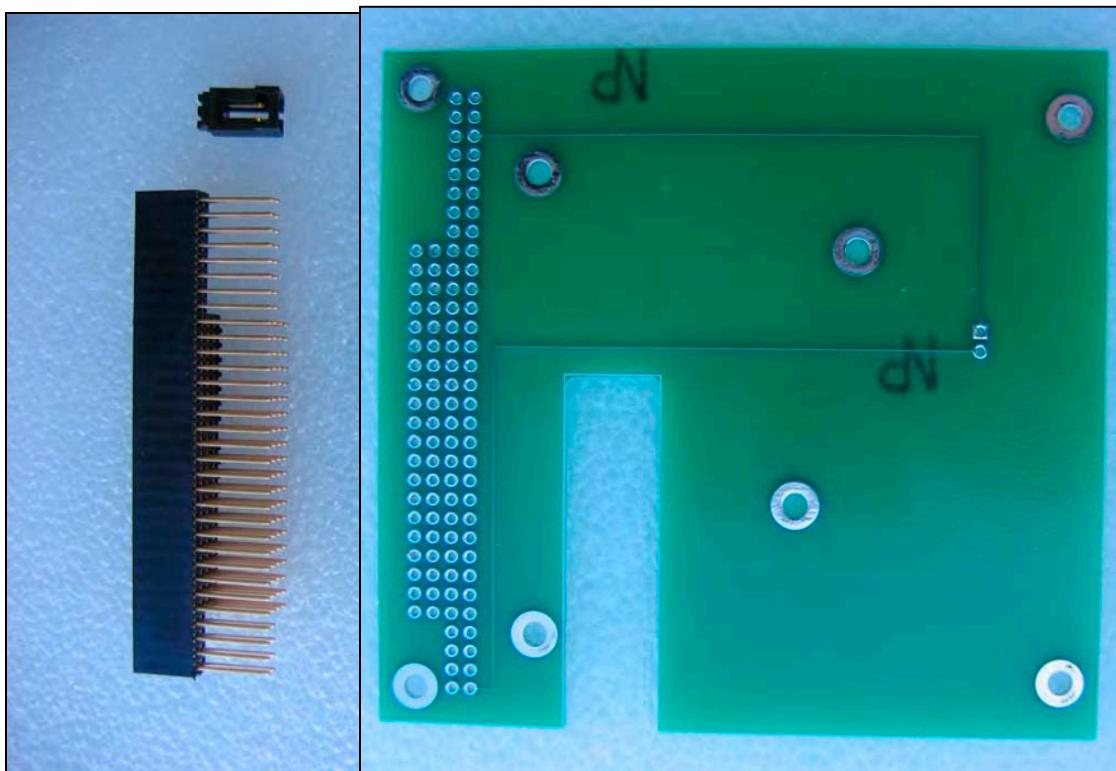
Custom PCB adapter card and connectors before assembly.
